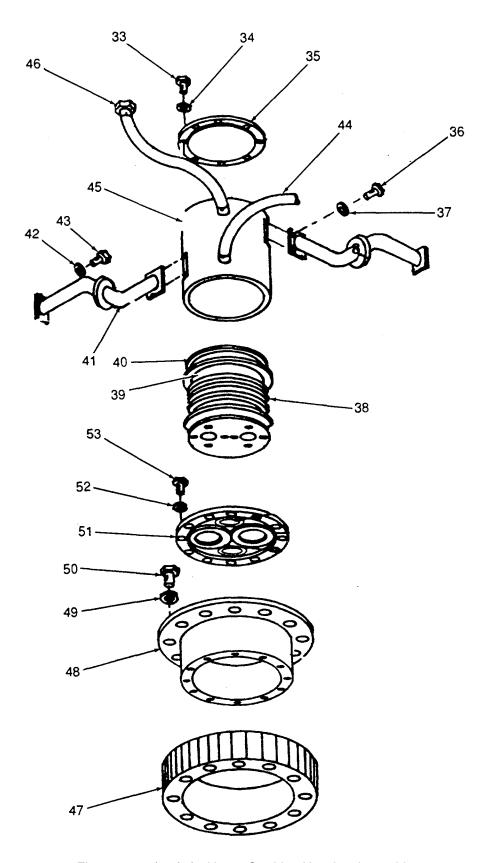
(3 of 3). Upper Outdrive Housing Assembly
